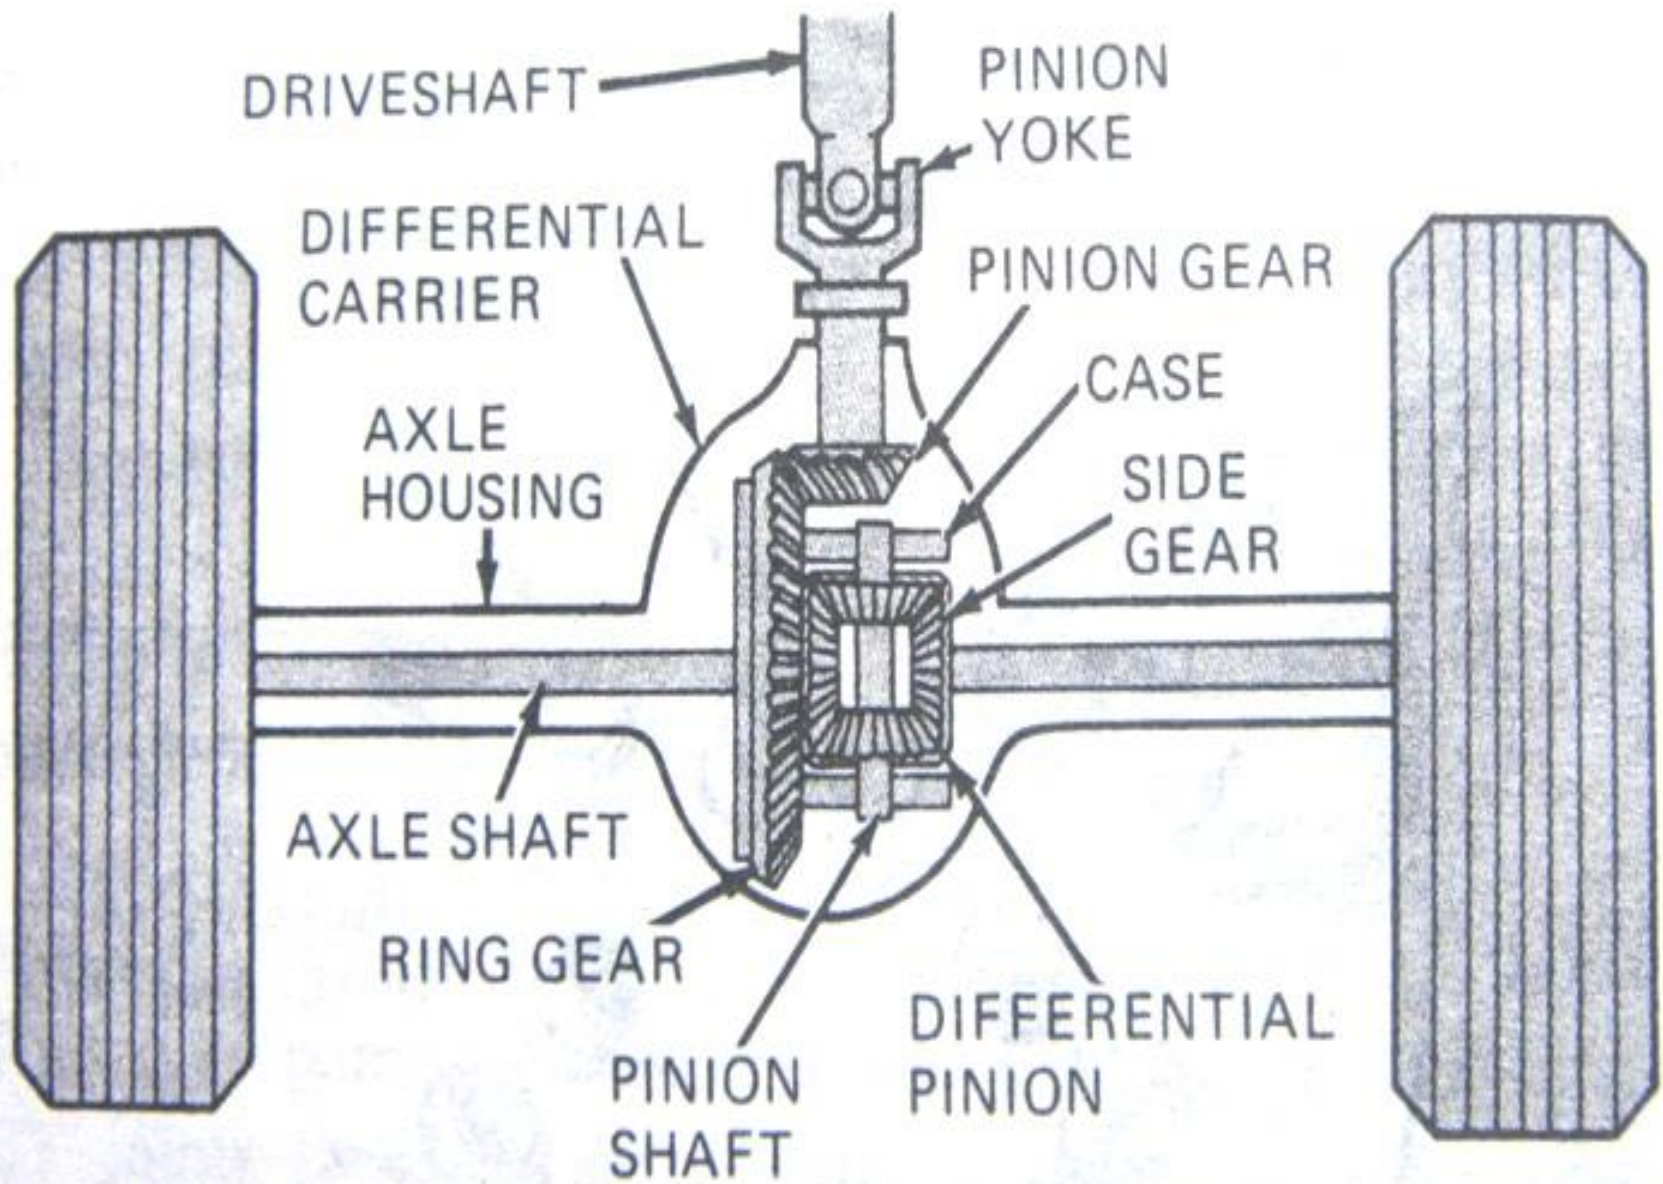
Rear drive axle, showing the gears and shafts in the final drive and differential. (ATW)
